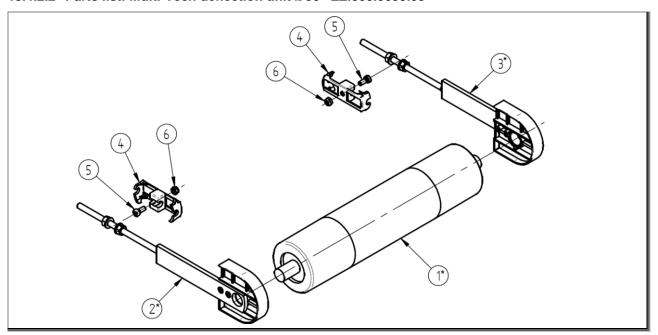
Parts list: Multi-Tech deflection unit Ø80– ZZ.800.0093.03
